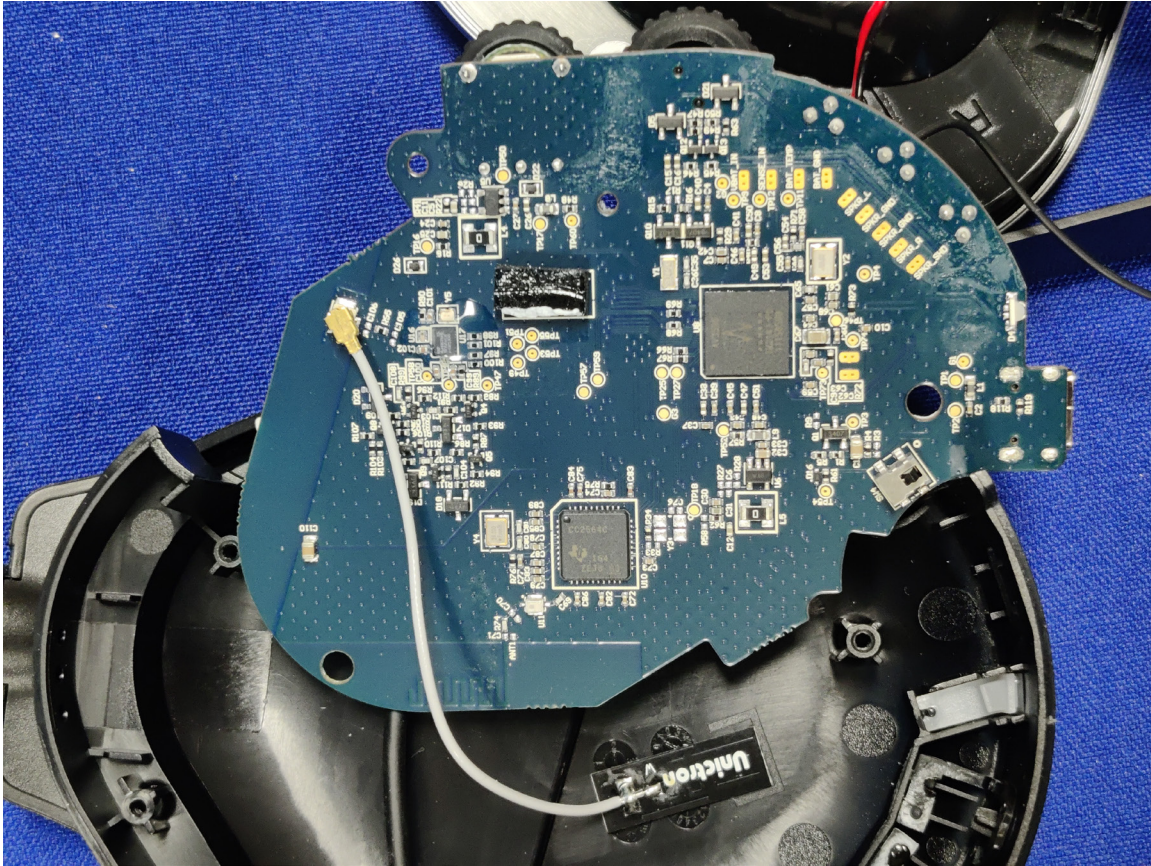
Internal Photo of Stealth700P-MAX-RX – Bottom PCB (Left Ear)
